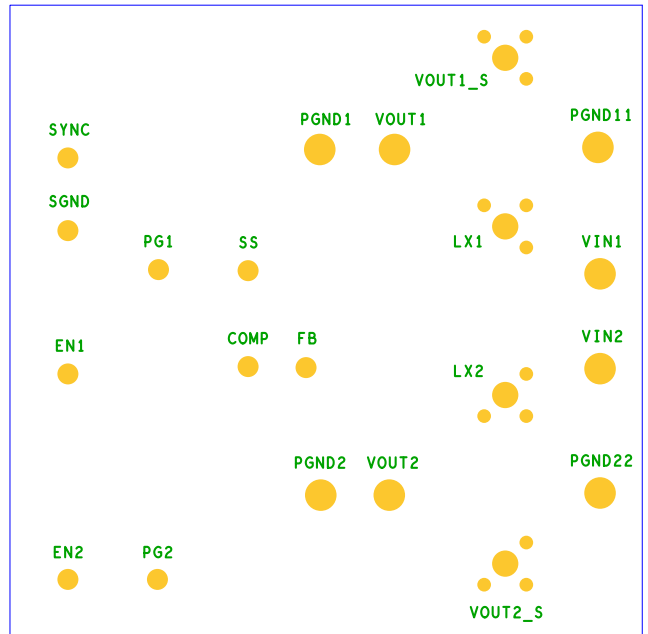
BOTTOM COMPONENTS (MIRROR)
